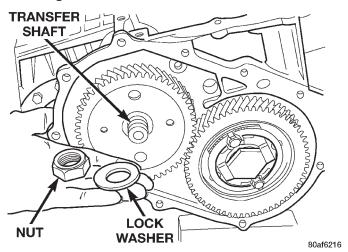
Transfer Shaft Gear Nut and Coned Washer SPECIAL TOOL L-4407-6 TRANSFER SHAFT GEAR
